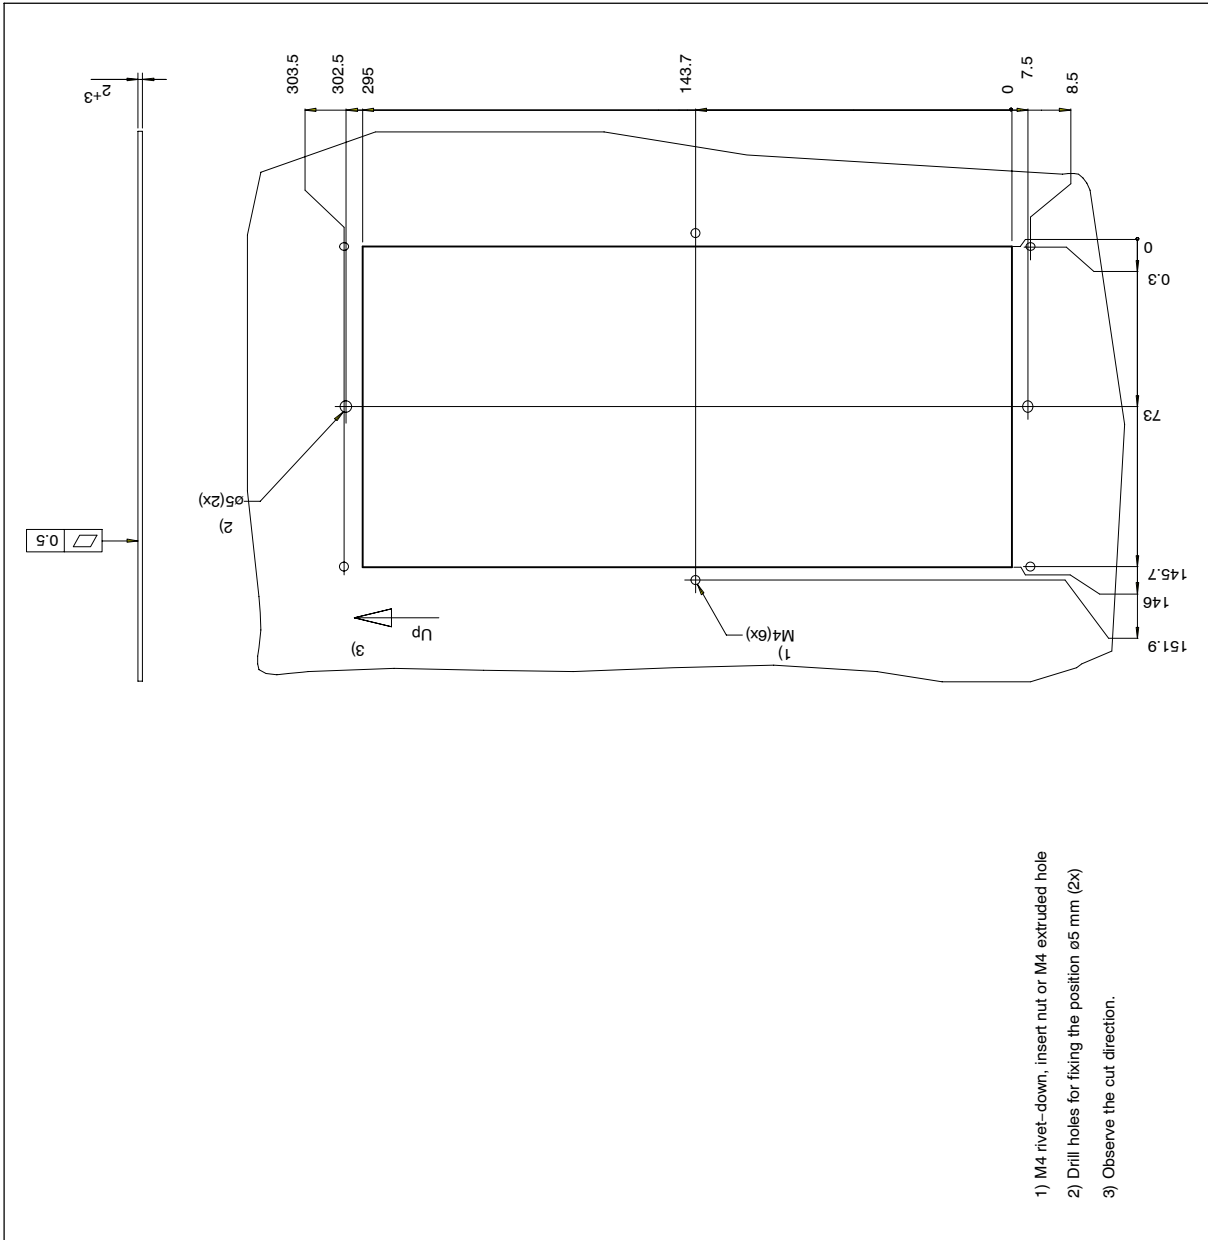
Drilling pattern for the keyboard (vertical layout for installation alongside the PCU)
